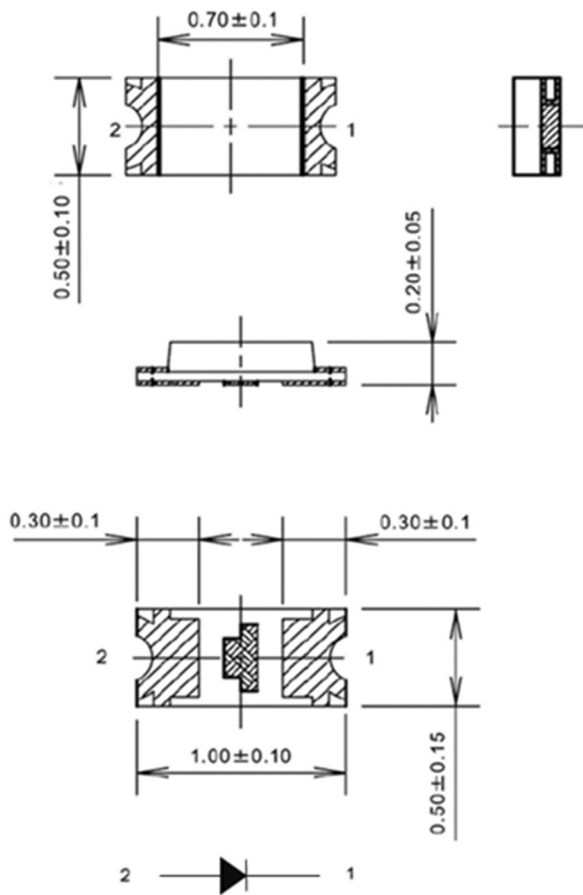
Mechanical drawings of the 1005 package (unit in mm)
